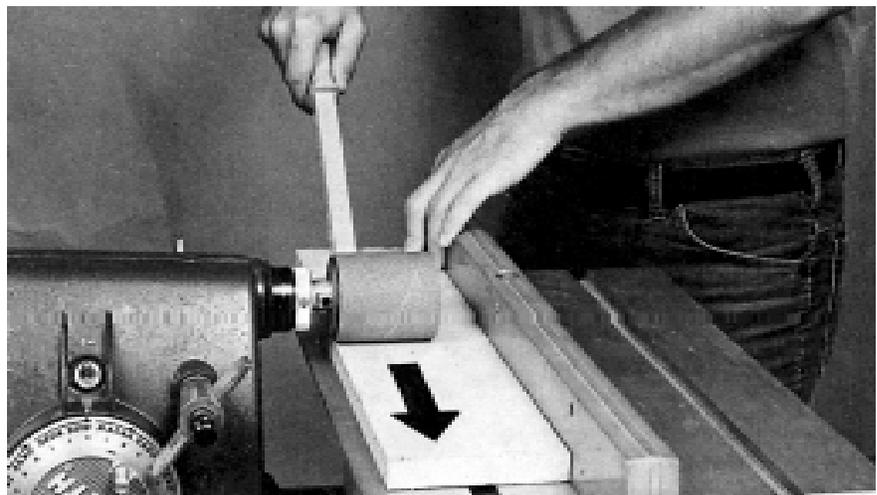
One way to surface sand wide stock. After making the first pass, turn the stock end-for-end and make a second pass.
